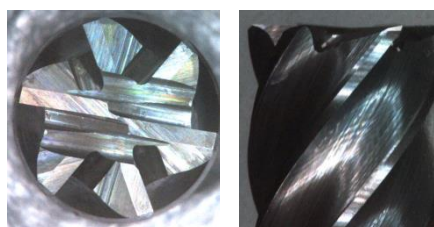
Example of end-mill designed and produced for Ti-6Al-4V (a) face view (b) side view
